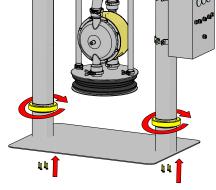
Gently lift up the device and place actuator bushing in the baseplate.
